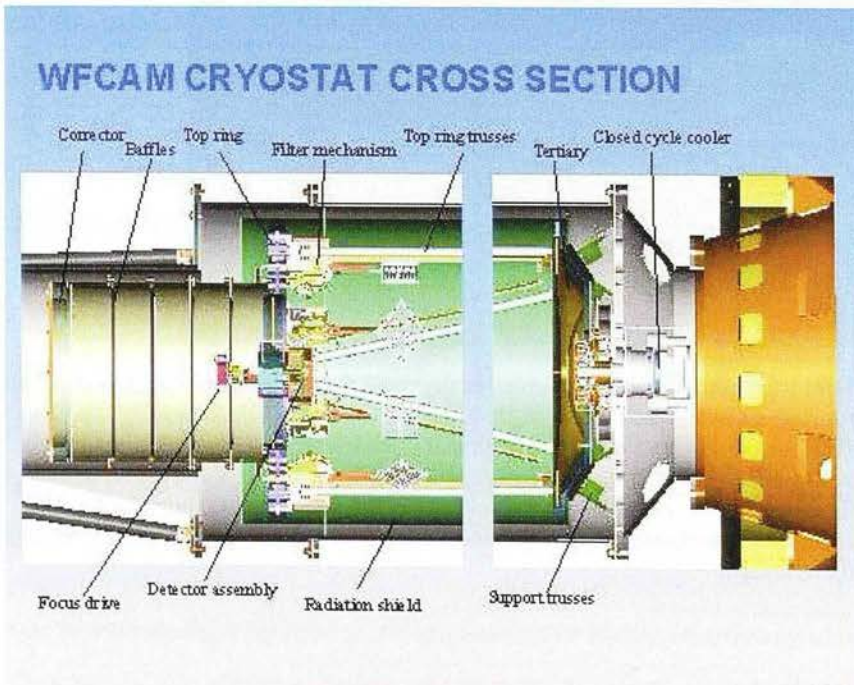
Mechanical cross sectional drawing of the WFCAM cryostat. Location of the closed cycle cooler, the radiation shield, the top ring and the corrector plate shown. The cryostat's window is off the diagram to the left hand side.
